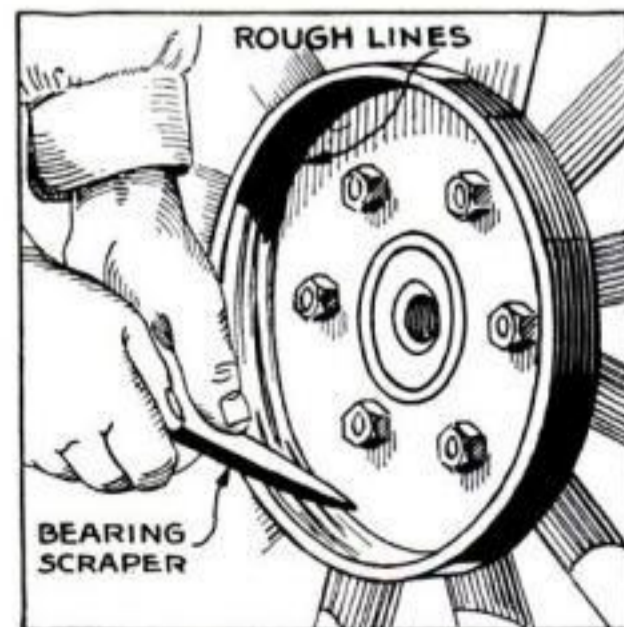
Tool's marks on braking surface of drum cause pounding. Polishing ends it.
